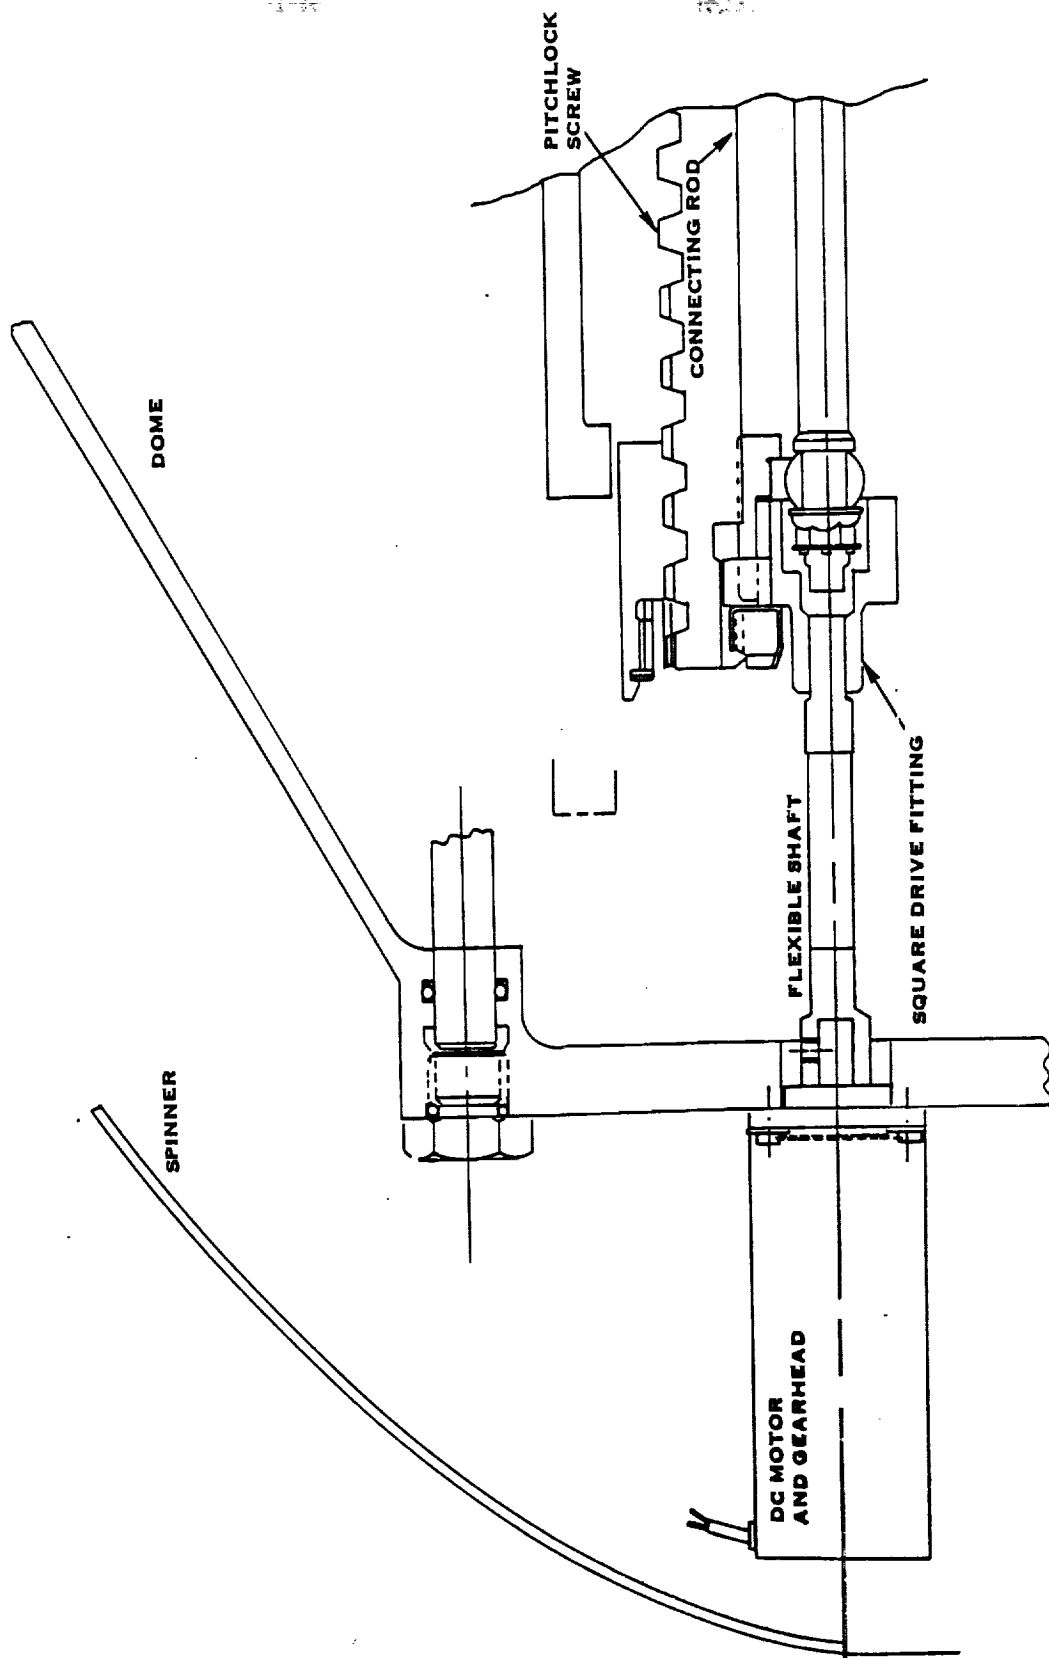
MOTOR DRIVEN PITCH CONTROL MECHANISM
